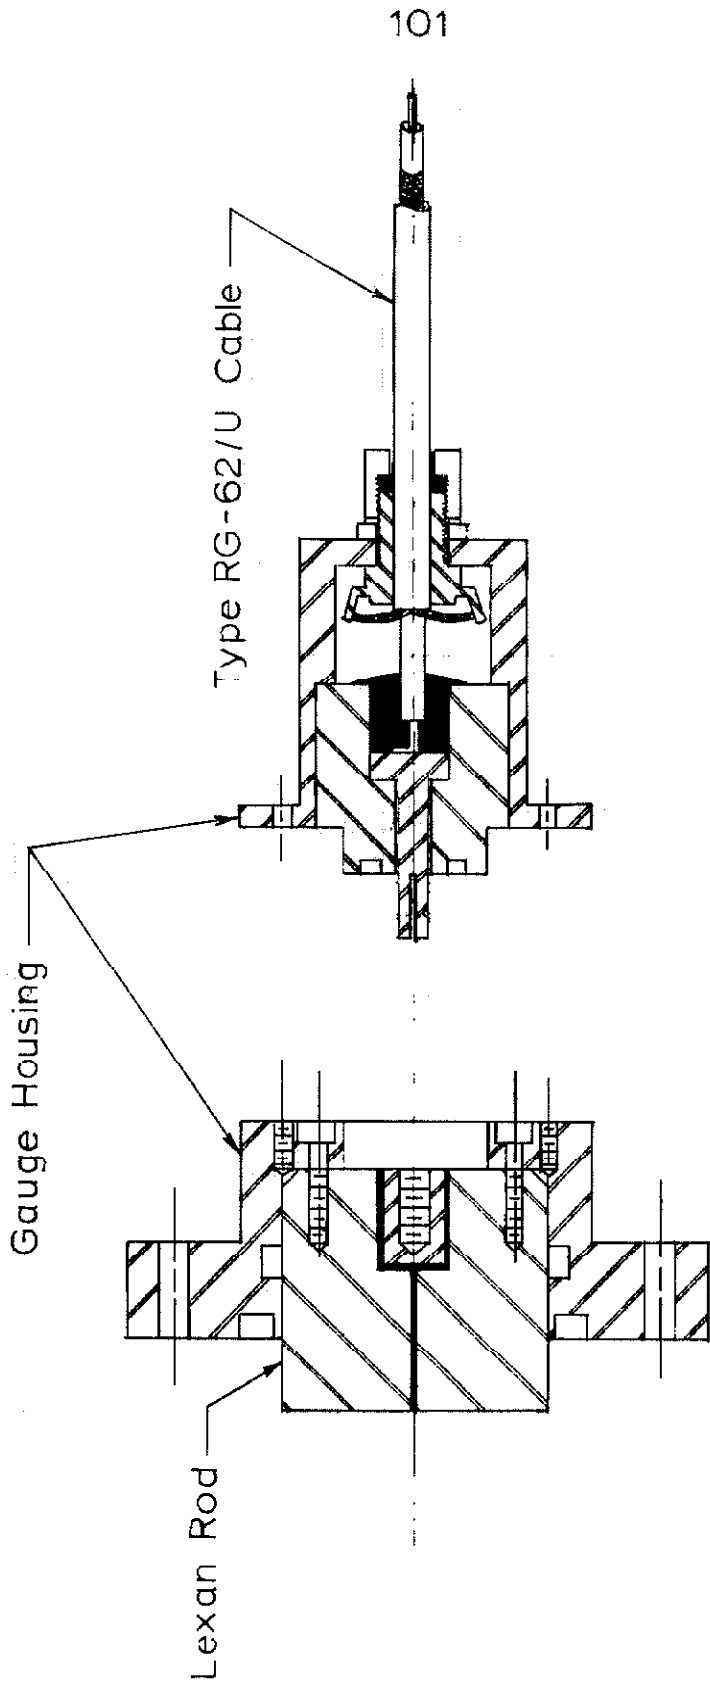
DRAWING OF PRESSURE GAUGE ASSEMBLY AND HIGH VOLTAGE CONNECTION
